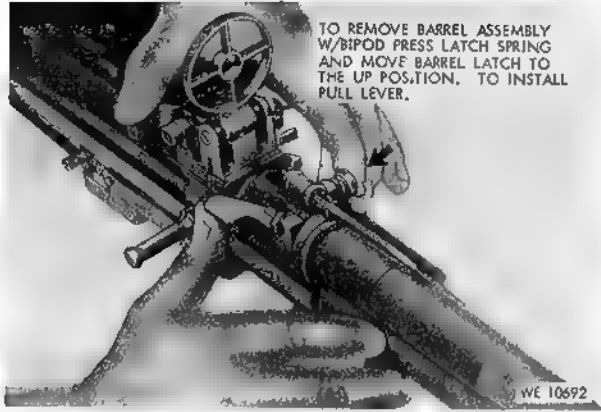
Removing or installing barrel assembly w/bipod assembly.
